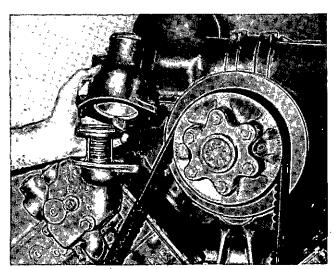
Installing thermostat - V6-Vim & V8-Vine
